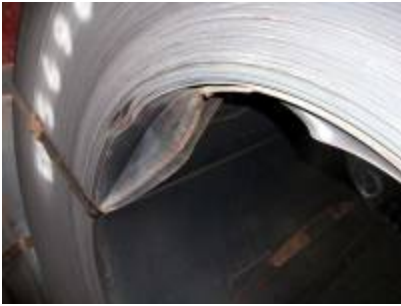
Hot rolled coils with inner windings locally dented/bent
